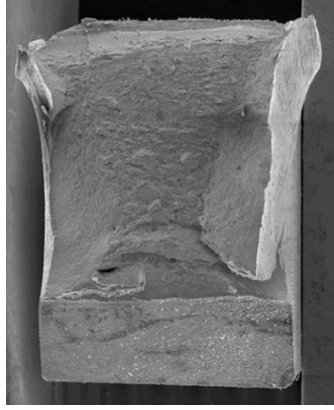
Tested impact specimens E2 04, E2 05, E2 06 after testing (Macro) and after complete breaking (SEM)
